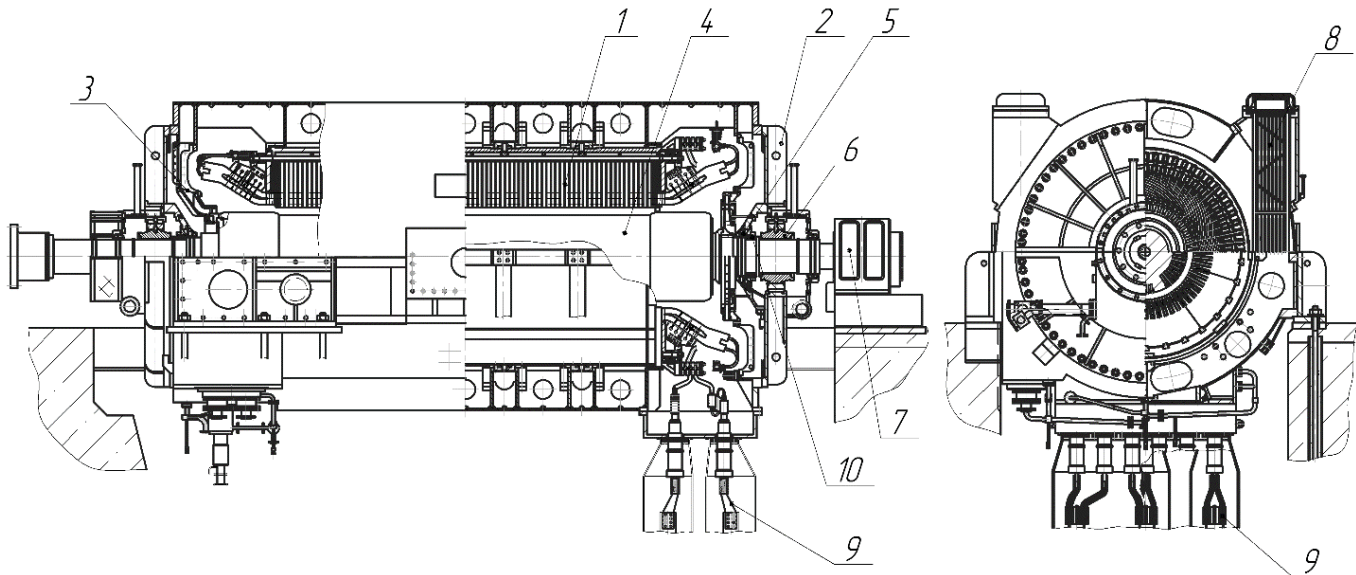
Design of Turbogenerator TGV-200: 1 – stator; 2 – external shield; 3 – internal fairing; 4 – rotor; 5 – rotor shaft sealing; 6 – bearing; 7 – brush-holders device; 8 – gas cooler; 9 – end terminal; 10 – oil trap
